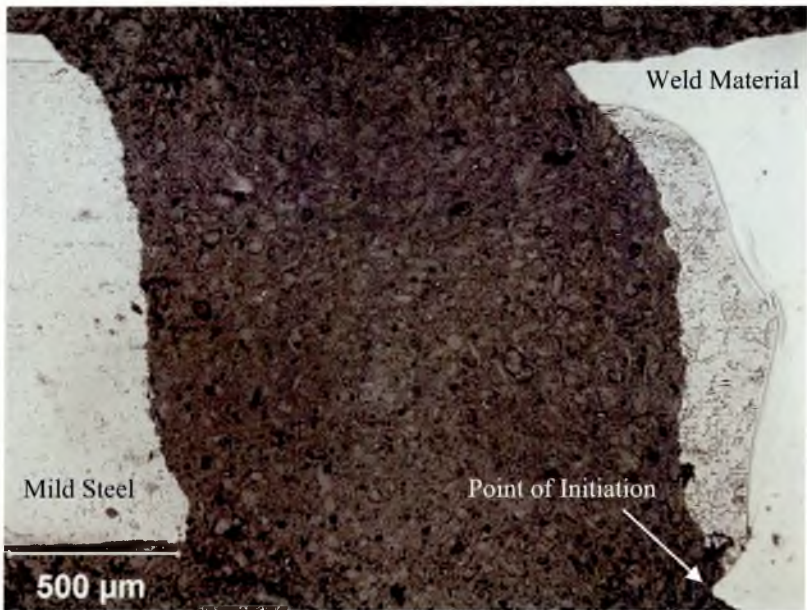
Photo showing fatigue failure for a LHW butt joint of similar thickness, the failure occurs on the weaker mild steel side of the joint.
